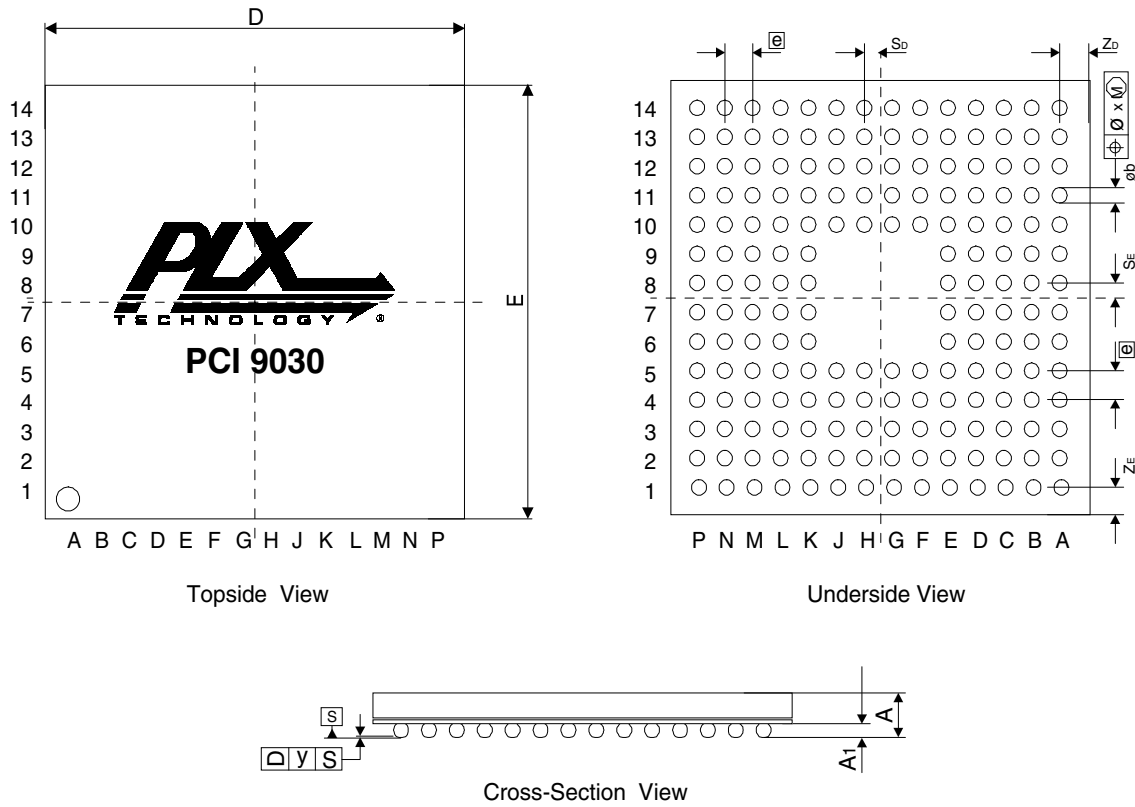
180-Pin μ BGA Package Mechanical Dimensions—Topside, Underside, and Cross-Section Views
